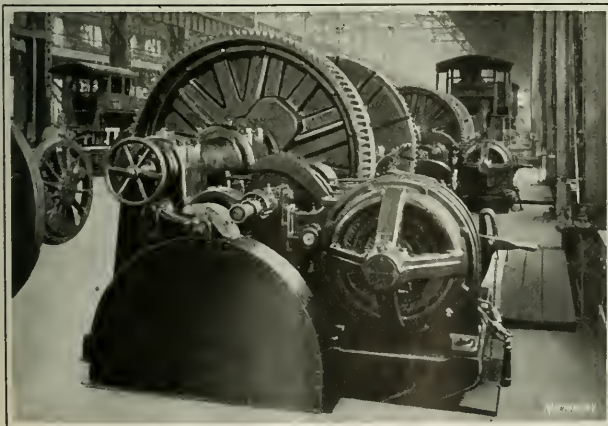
Wheel Lathe driven by 75-horsepower Wound-rotor Alternating-current Motor
